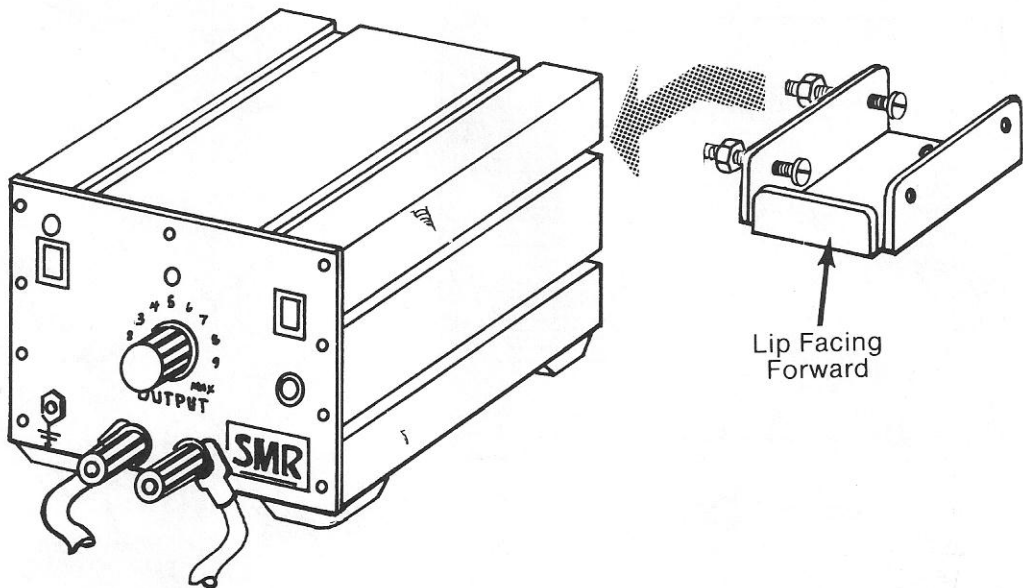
HOT CUBBY TOOL HOLDER INSTALLATION.
